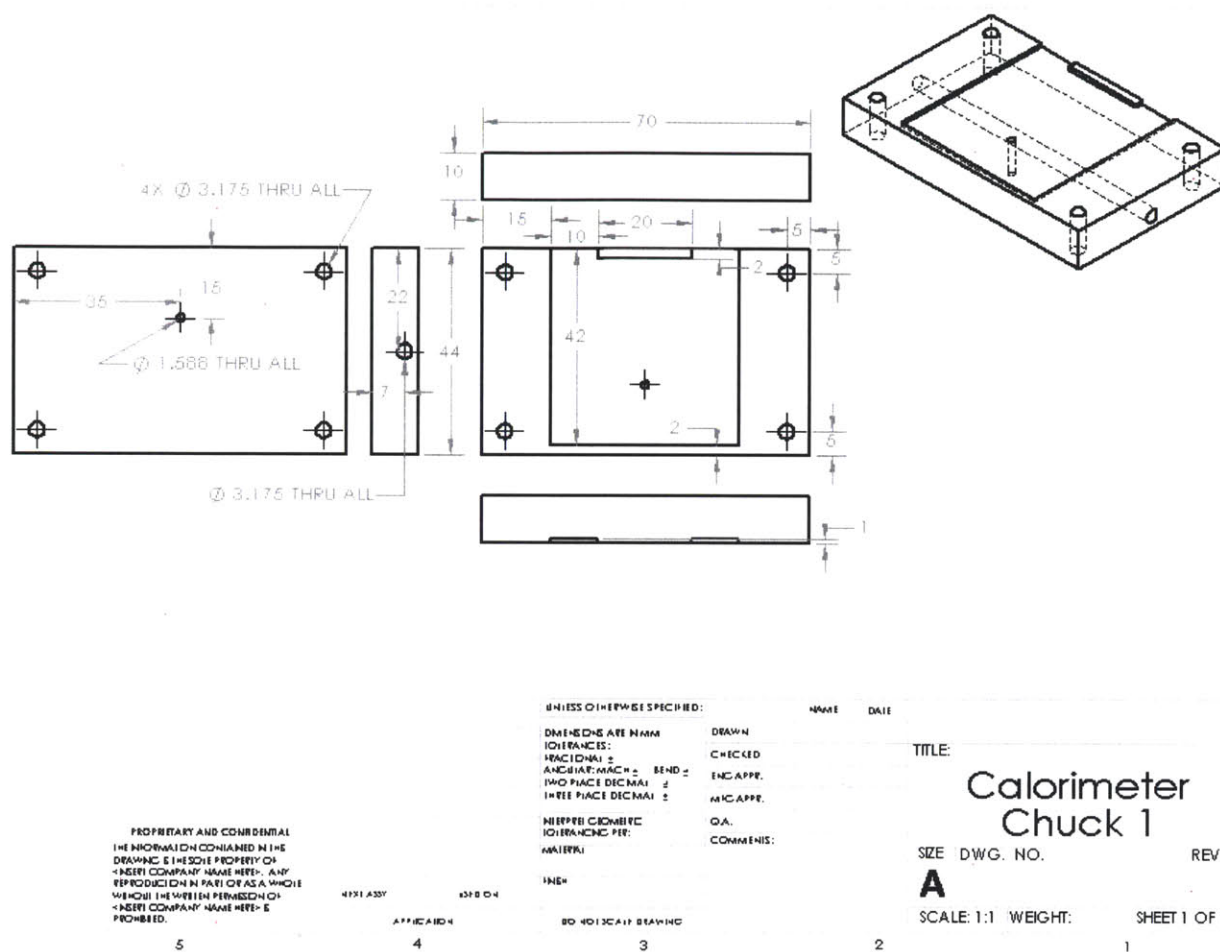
SolidWorks drawing of microcalorimeter 1 chuck. Dimensions are in mm. Scale 1:1.
